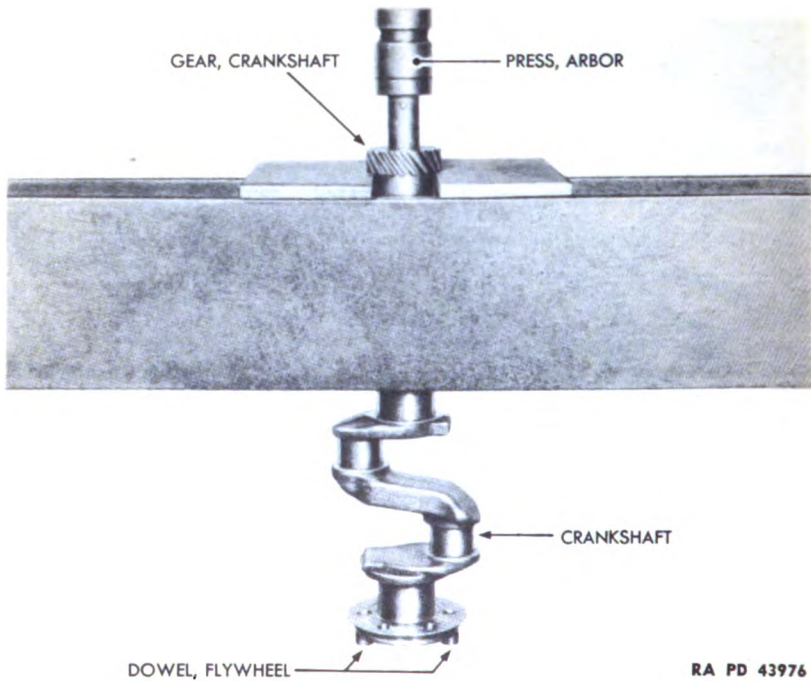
Pressing Crankshaft Gear from Crankshaft
